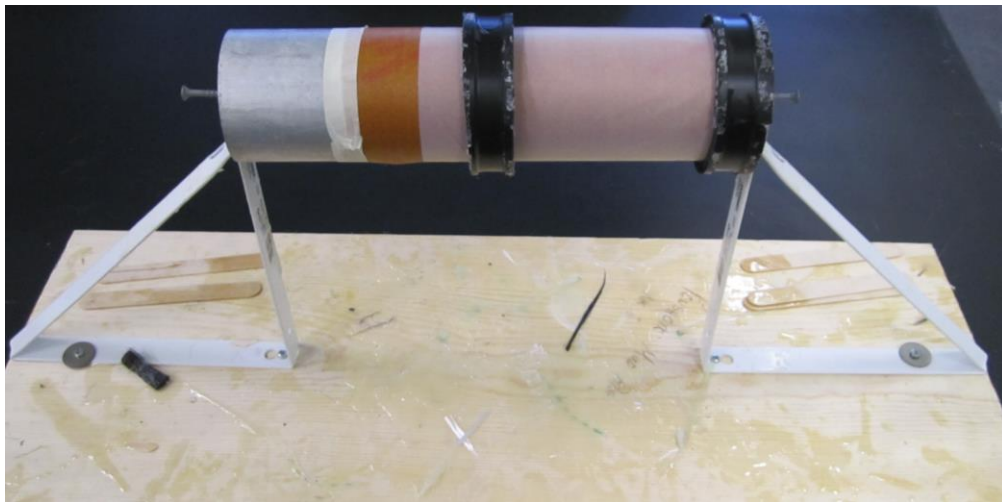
Cylinder Mold Prepared for Composite Cylinder Layup.
